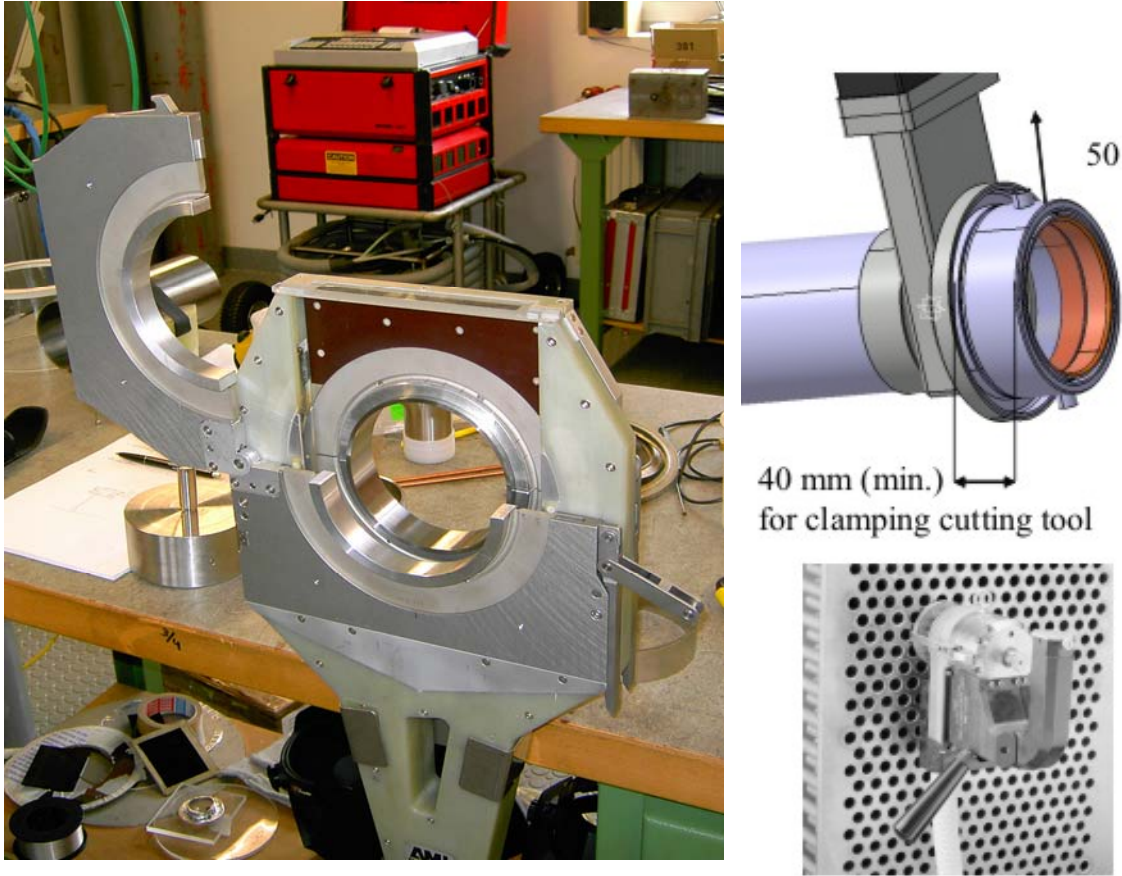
The tube-to-tube configuration used for the exploratory automated orbital welding tool (left) and plate-to-tube configuration used for the adapted welding tool for the remote steering torus window (right).
